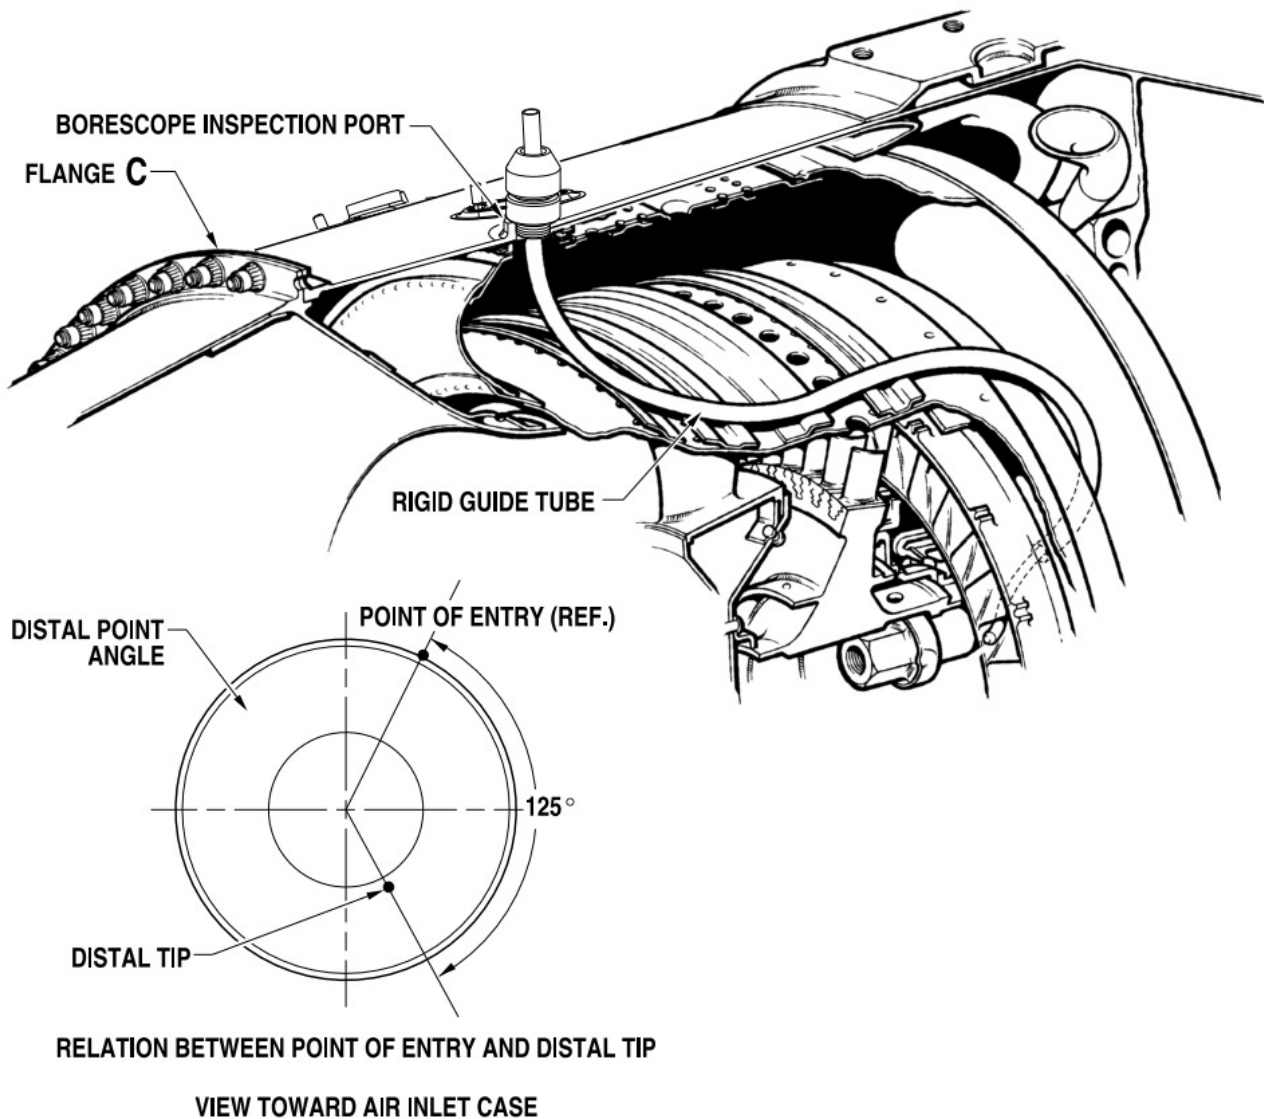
Guide Tube Orientation (Task 72-00-00-280-803)
